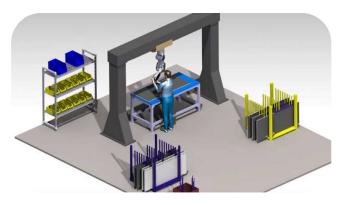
Industrial modules assembly – SHERLOCK vision.
